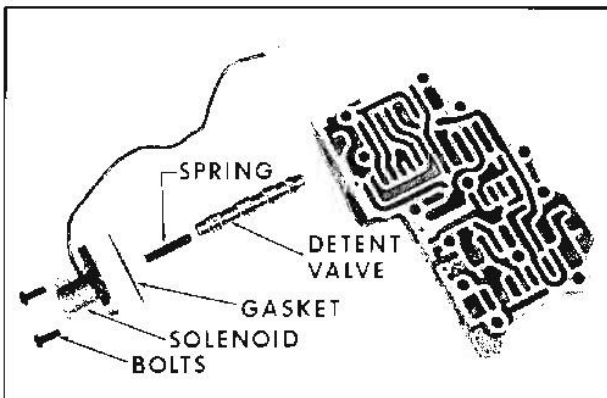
B-43 Downshift Solenoid and Detent Valve - Exploded View
